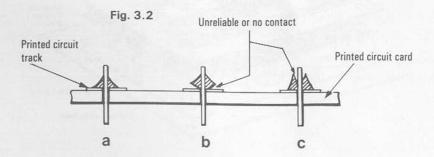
(b) and (c) show exaggerated profiles of unsuccessful joints. These can be caused by inadequate heating of one part, or the other, of the joint, due to the iron being too cool, or not having been in direct contact with both parts; or to the process being performed too quickly. An alternative cause might be contamination of the unsoldered surface.
